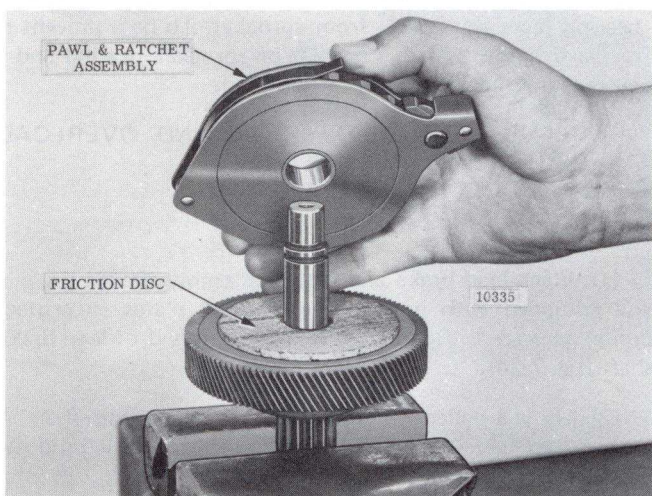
Removing Pawl and Ratchet Assembly From Load Brake Shaft
